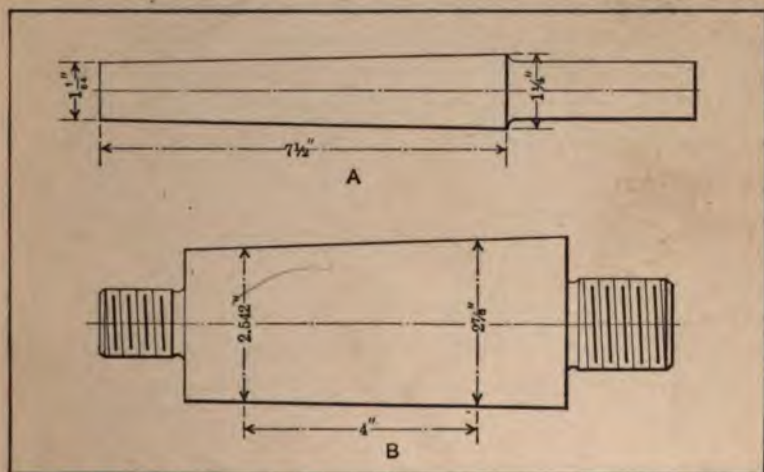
(A) Blank for Taper Reamer. (B) Taper Clamping Bolt
